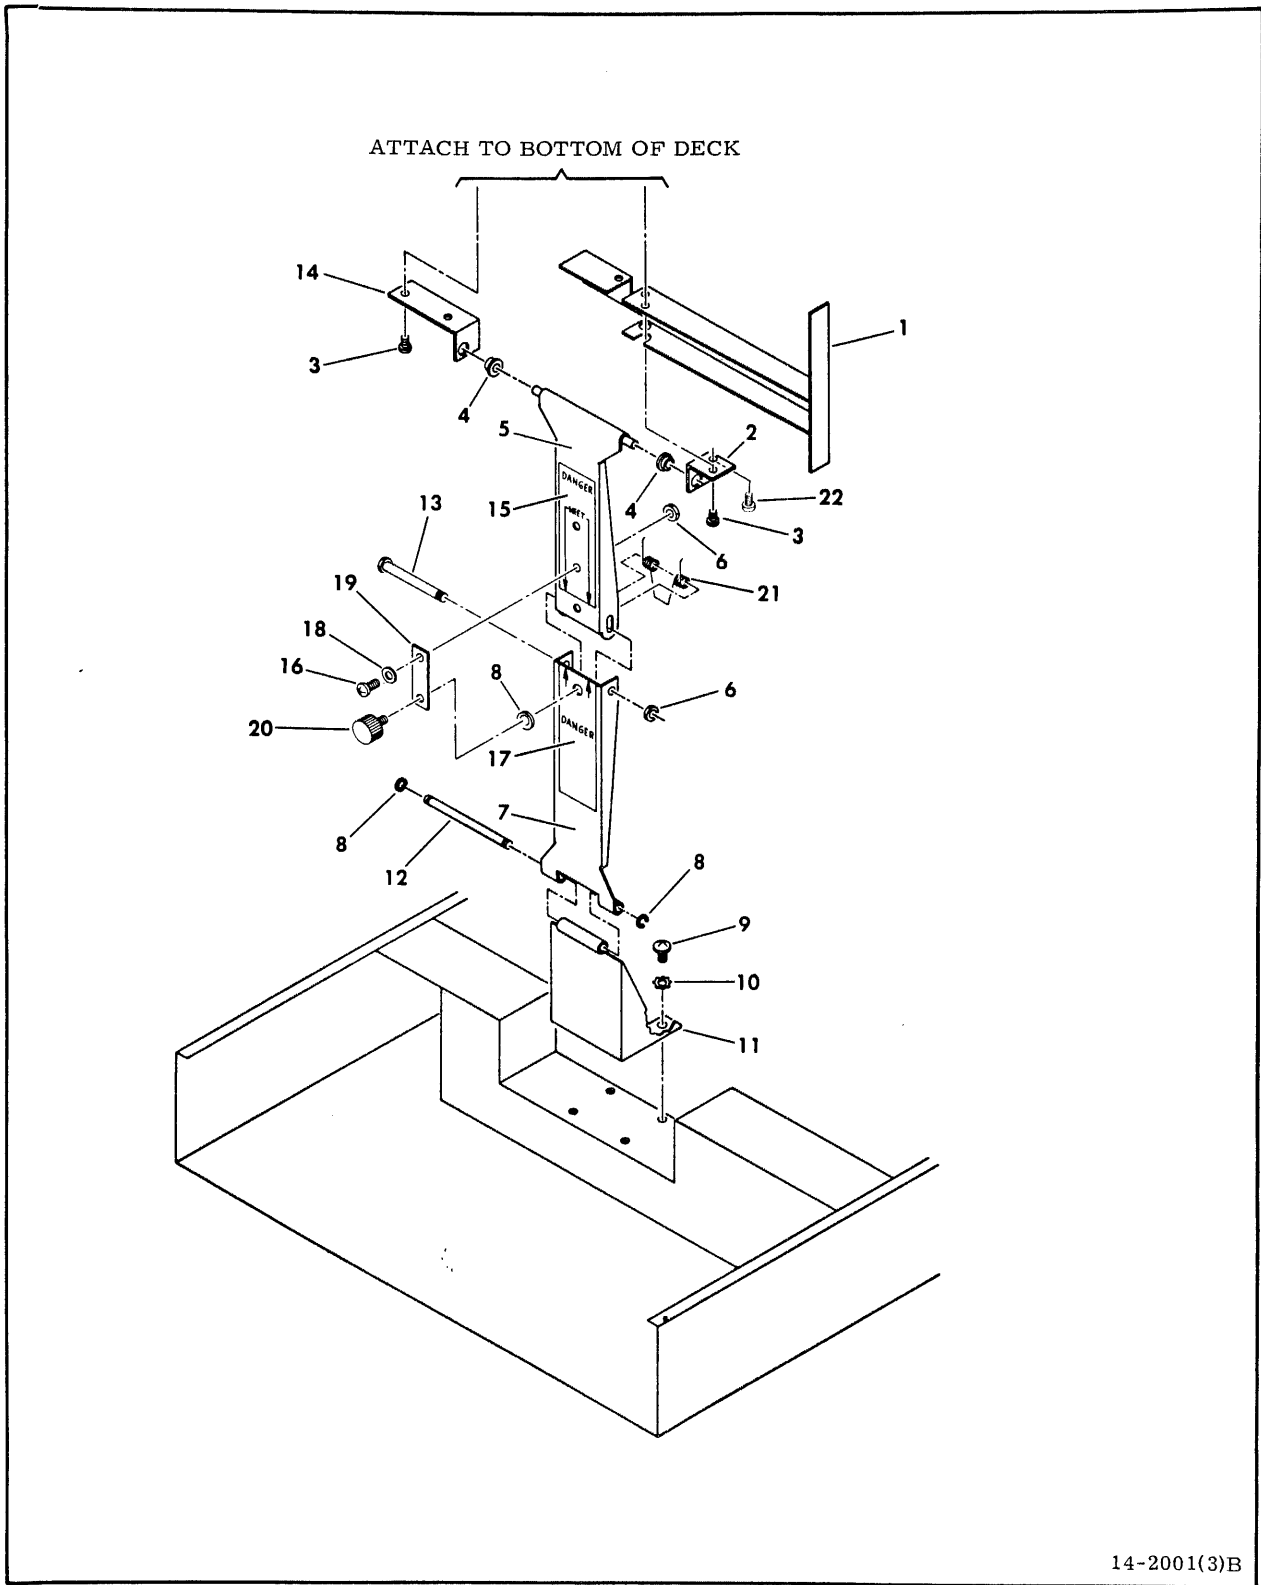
Drive Electronics Assembly (Sheet 3)
